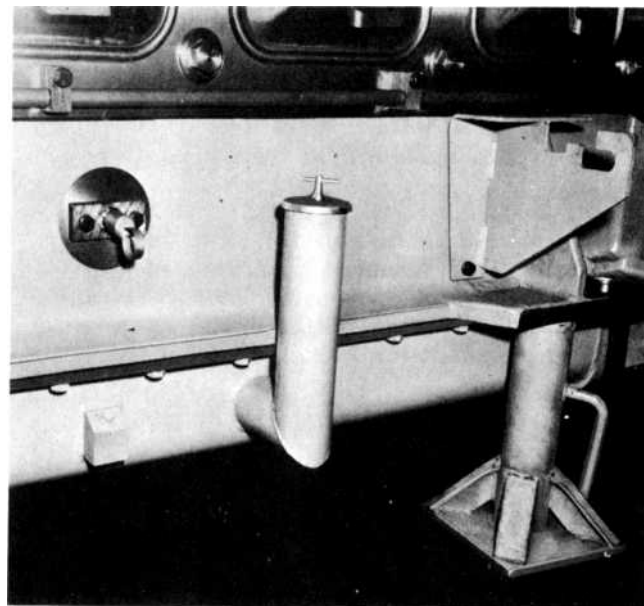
Lube-oil fill pipe and oil-level dip stick
